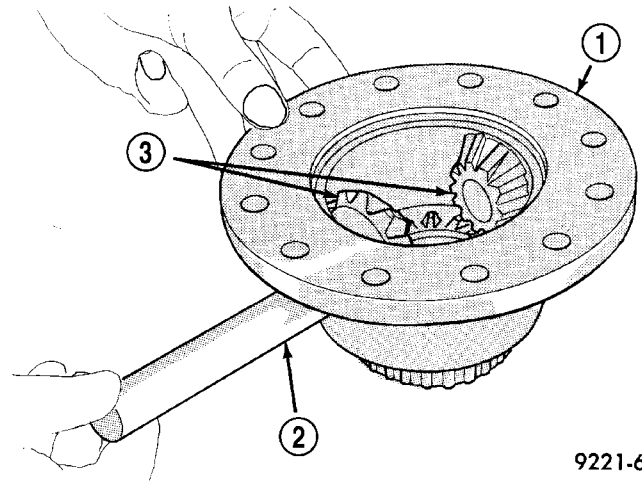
Install Differential Pinion Shaft and Remove Pinion Gears and Side Gears
